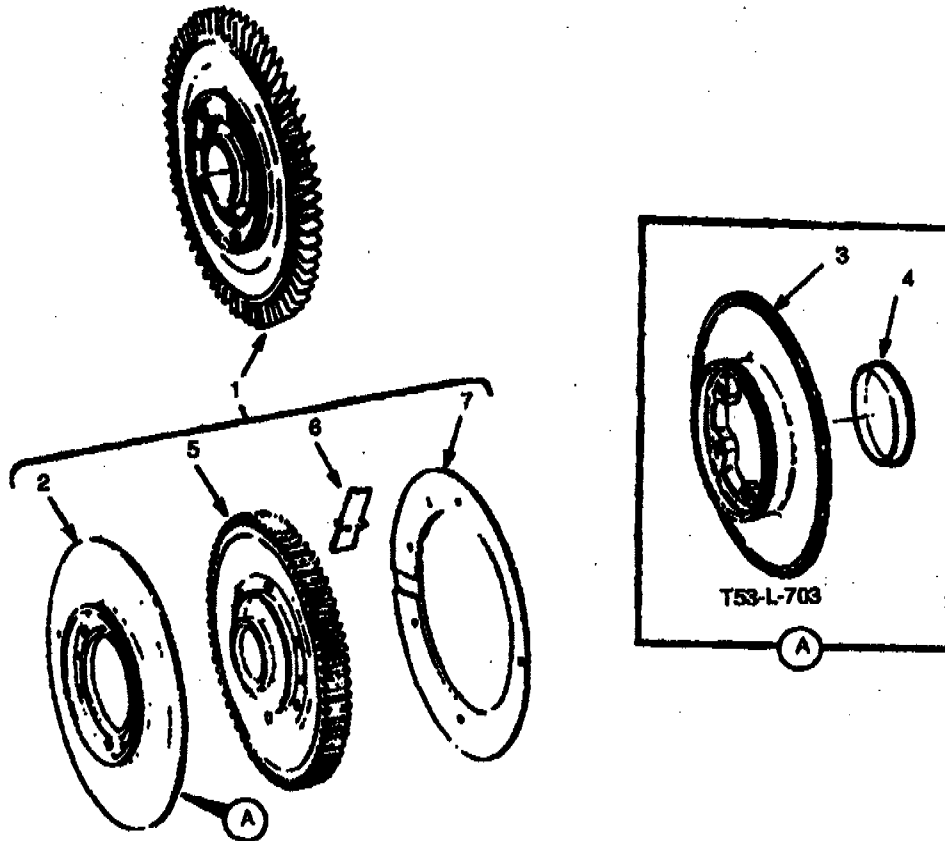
First Stage Gas Producer Turbine Rotor Assembly.
